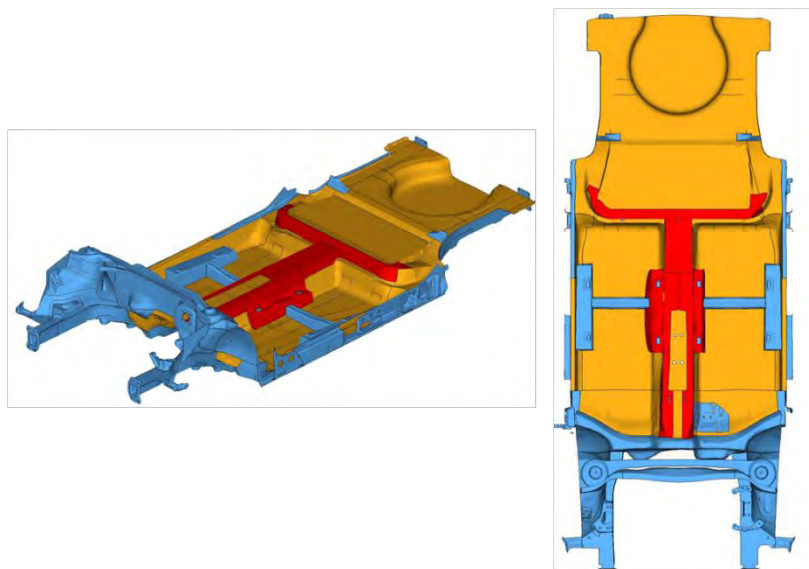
Modified floor sheets (yellow) and reinforcement sheets (red) for battery system integration
